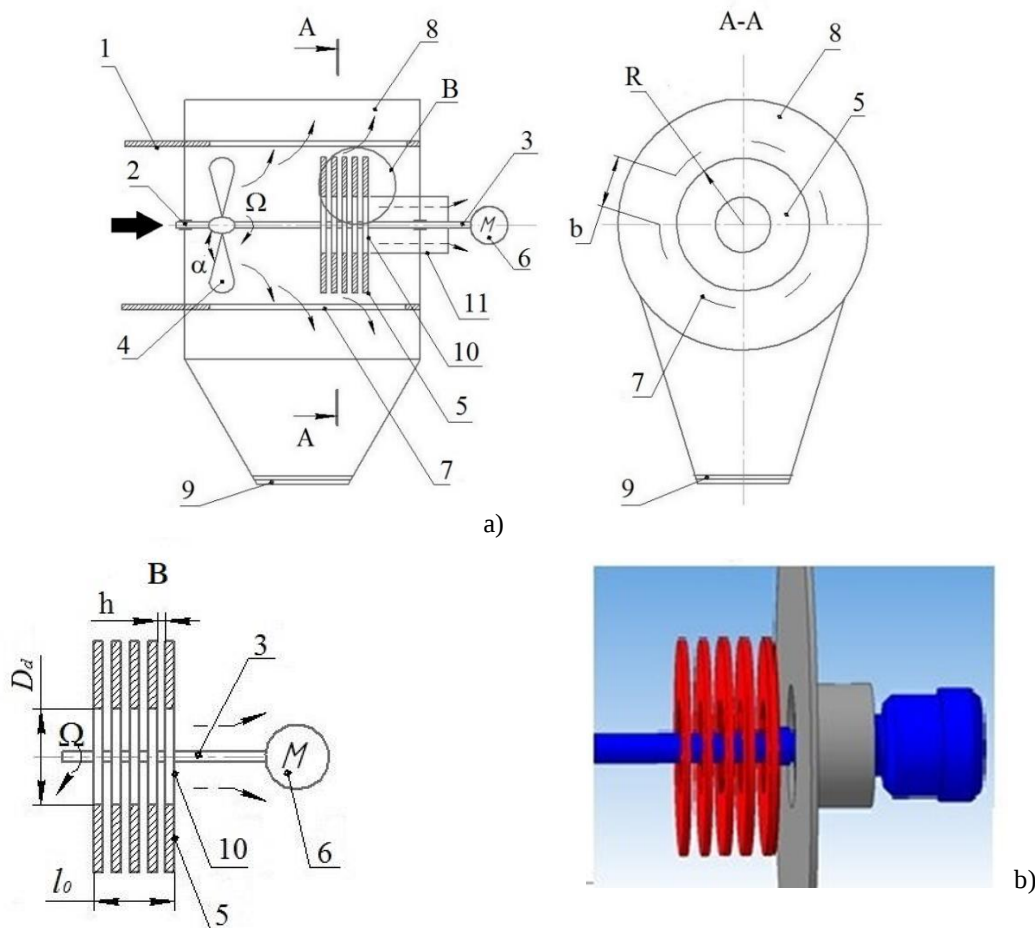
Constructive scheme of the developed rotary cyclone with a multi-disc purifier: a – general scheme; b – multi-disc purifier 1 – housing; 2 – holding blocks; 3 – axle; 4 – swirler; 5 – disk purifier; 6 – electric motor; 7 – louvers; 8 – deposition chamber; 9 – sluice valve; 10 – holes of disks of purifier; 11 – outlet pipe.
